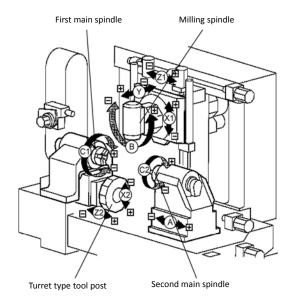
Example of multi-axis control multi-tasking machine (MORISEIKI Co.).
